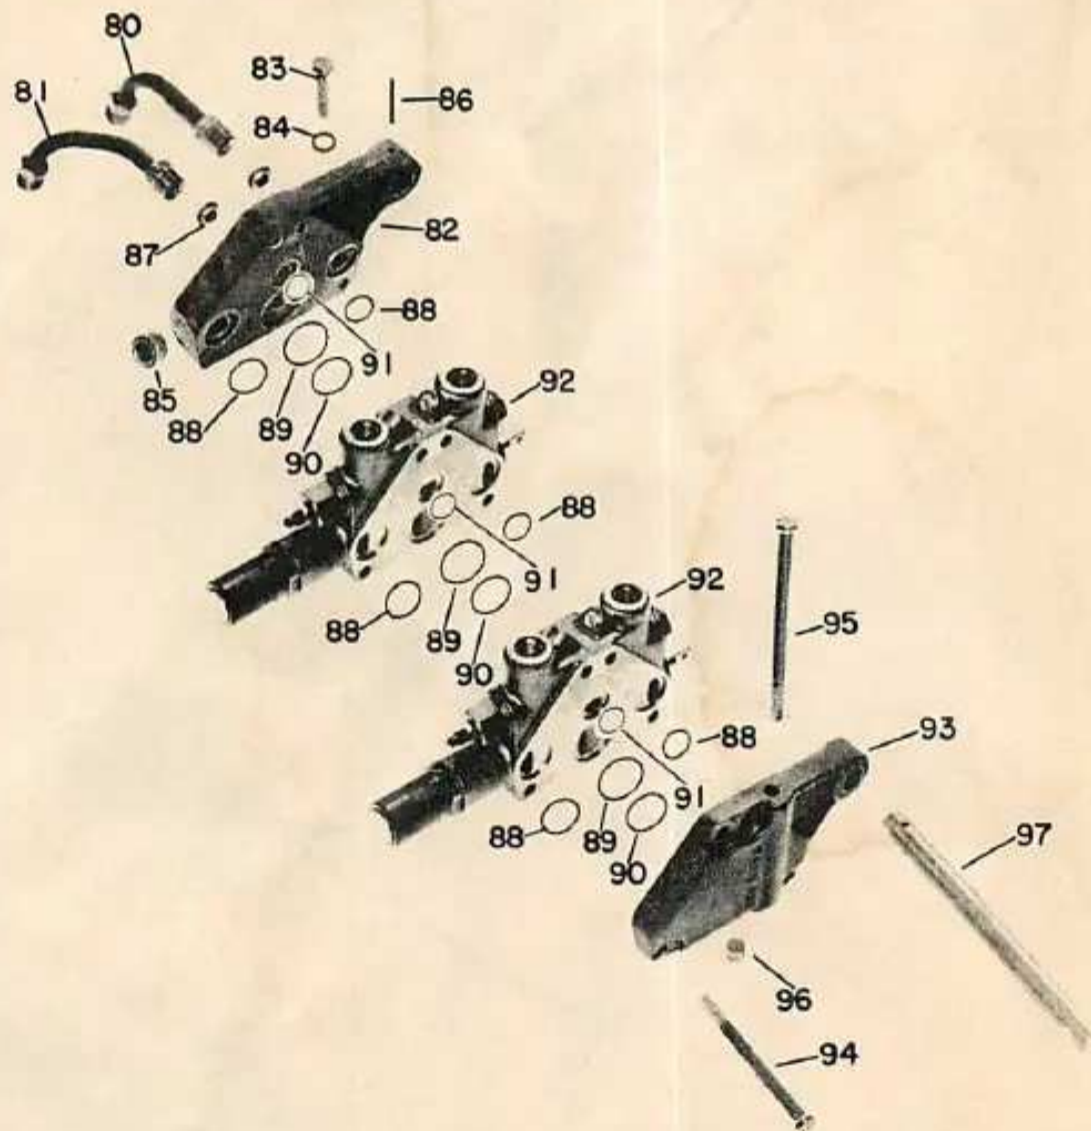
Exploded view of control valve assembly. Refer to Fig. O173 for exploded view of each control valve unit (92). Two control valve units are standard; one or two more units may be added as an option.
